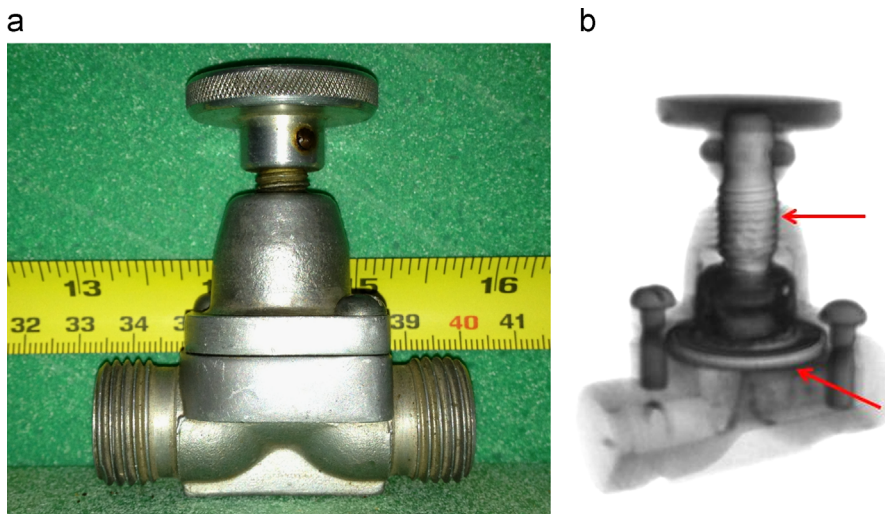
(a) Valve used for water stream control. (b) 3D image showing the screw and the rubber diaphragm.
